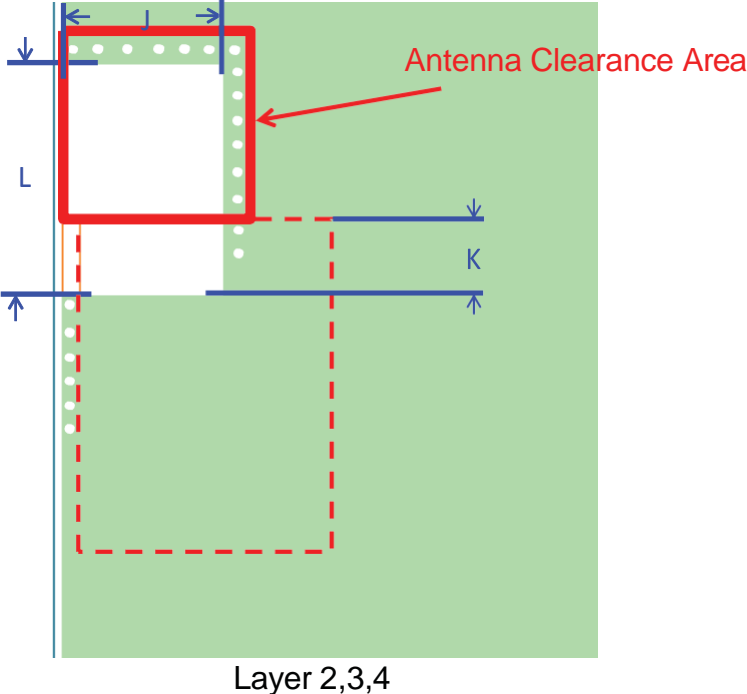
QN9080-001-M17 SIP on 36 mm x 31 mm EVB design guide - center edge
